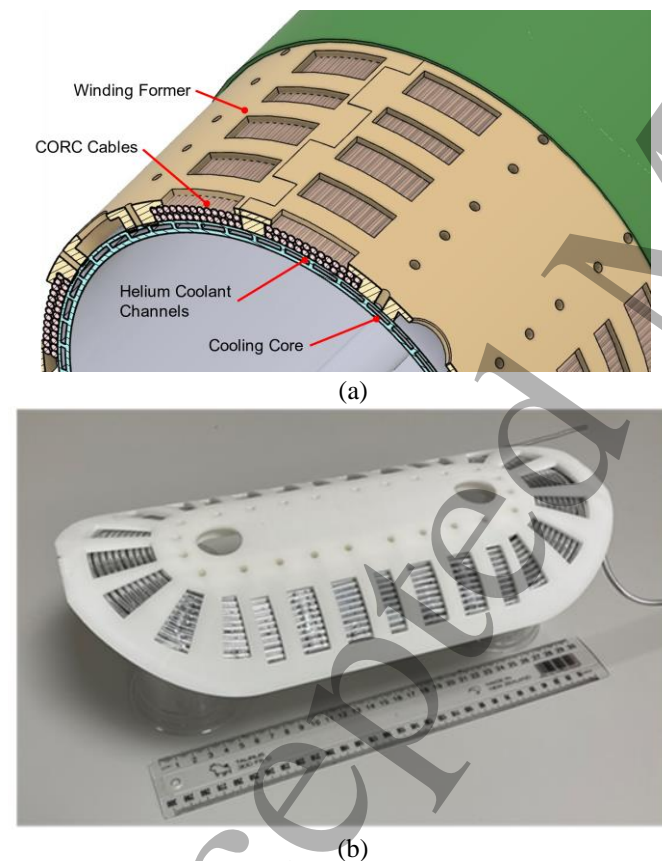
(a) Rotor coil design with integrated former for convection cooled rotor (b) test winding on AM integrated former.
